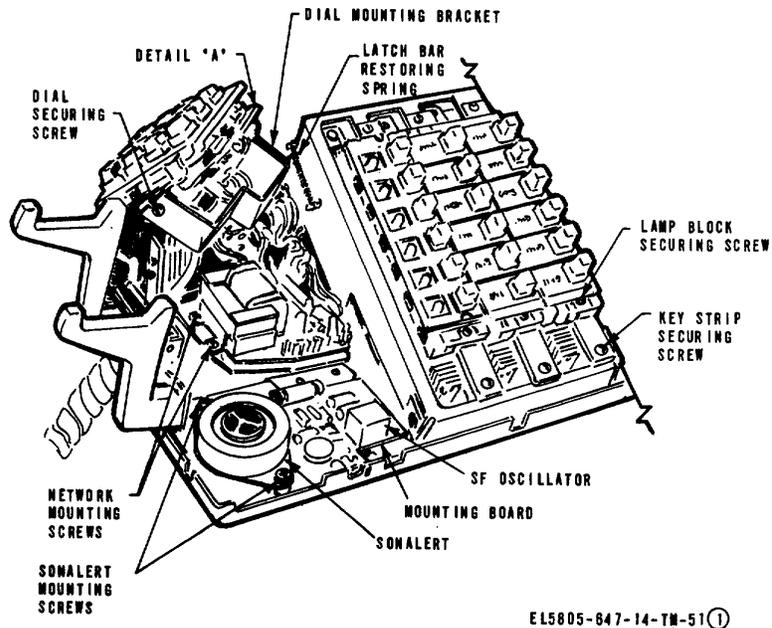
(1). 30 button key frame, component mounting (sheet 1 of 2).
